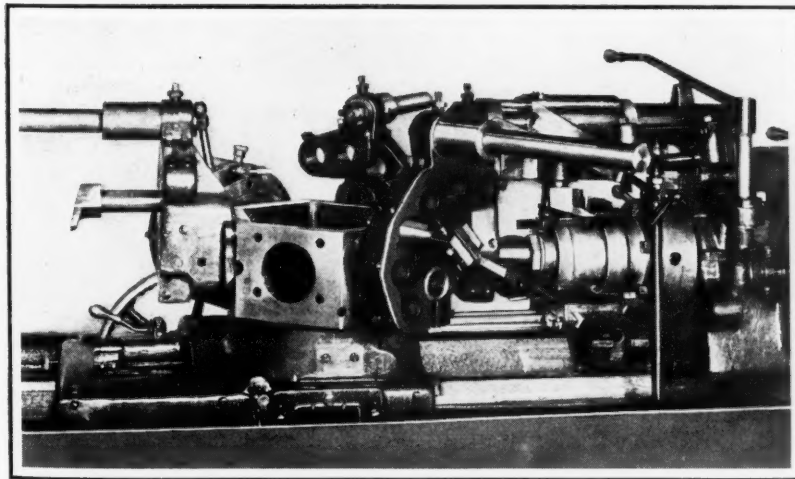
View of the Remainder of the Tooling Equipment, taken from the Rear of the Turret Lathe
